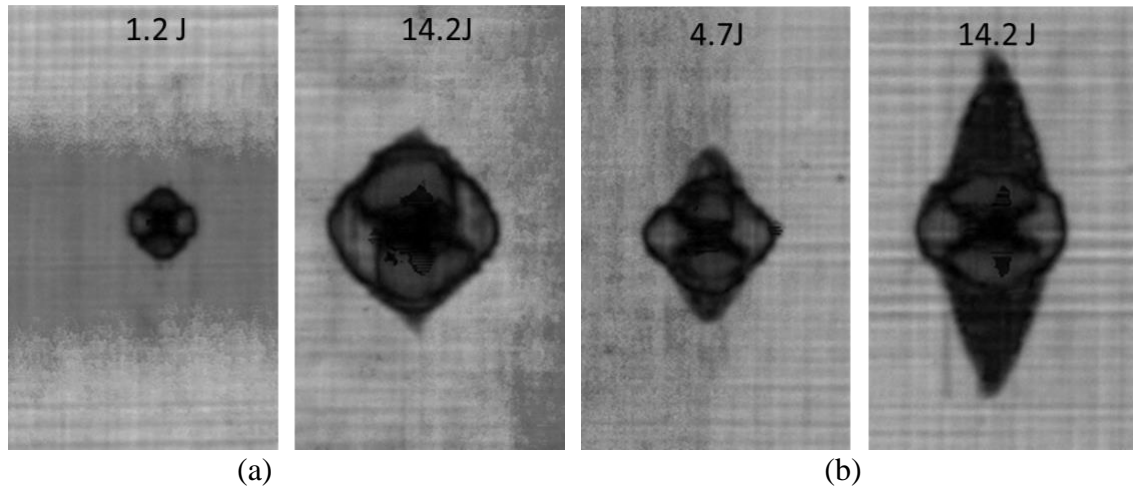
C-scans of impacted specimens. (a) Edge-supported condition. (b) Back-face supported condition.
